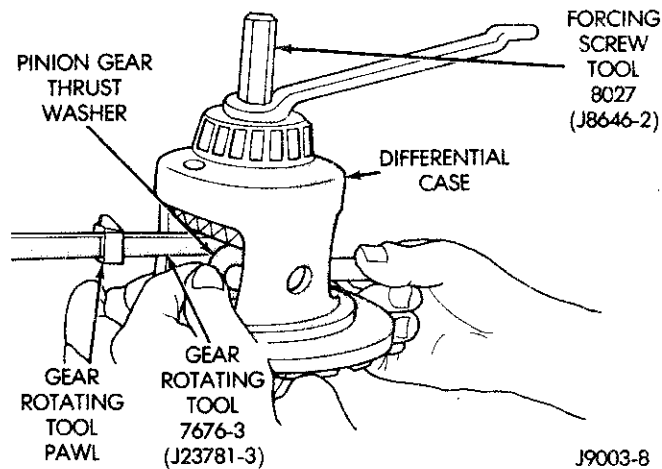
Differential Pinion Gear Thrust Washer Removal
